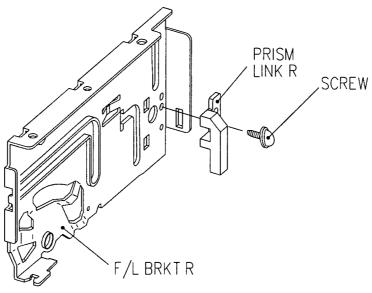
DISASSEMBLY OF THE F/L BRKT R
